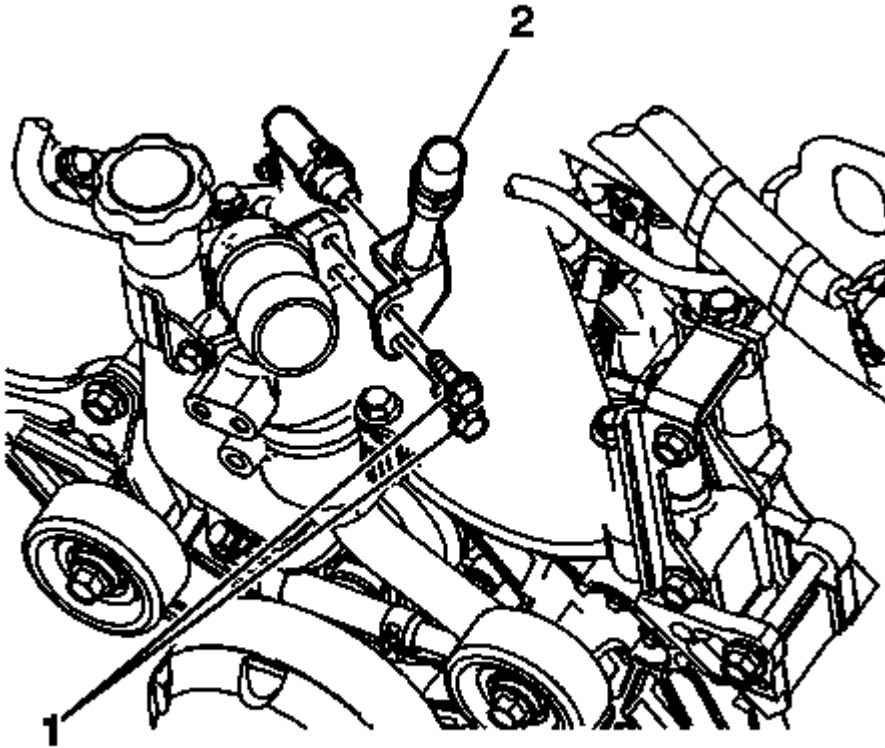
Identifying Fuel Pressure Valve And Bracket Bolts
